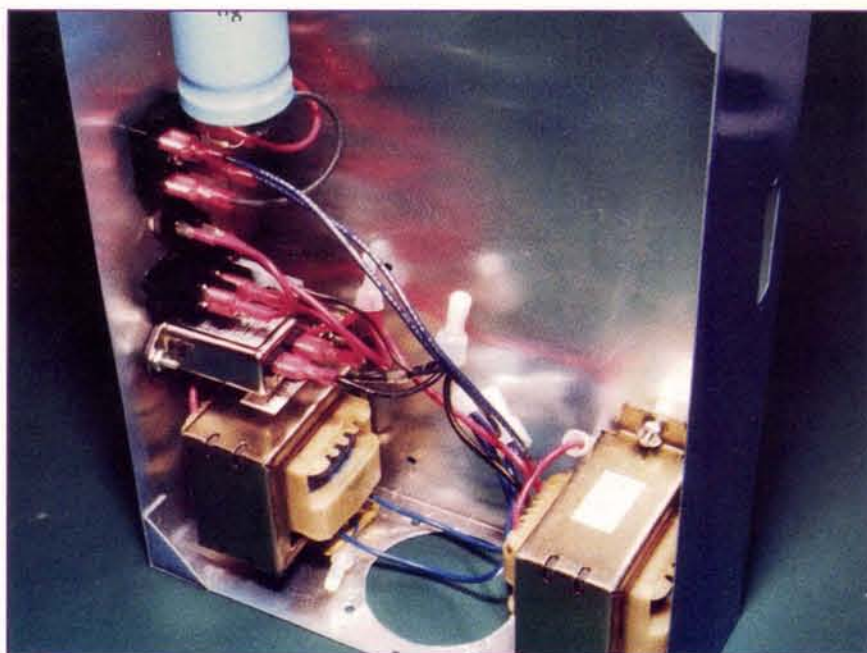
Power supply components installed in chassis. All connections to the transformers are made with closed-end crimp connectors, but all connections to the power entry module, switch, and rectifier bridge are made with insulated 1/4" quick disconnects. This way, all components can be changed out from the chassis without unsoldering or cutting any wires.
